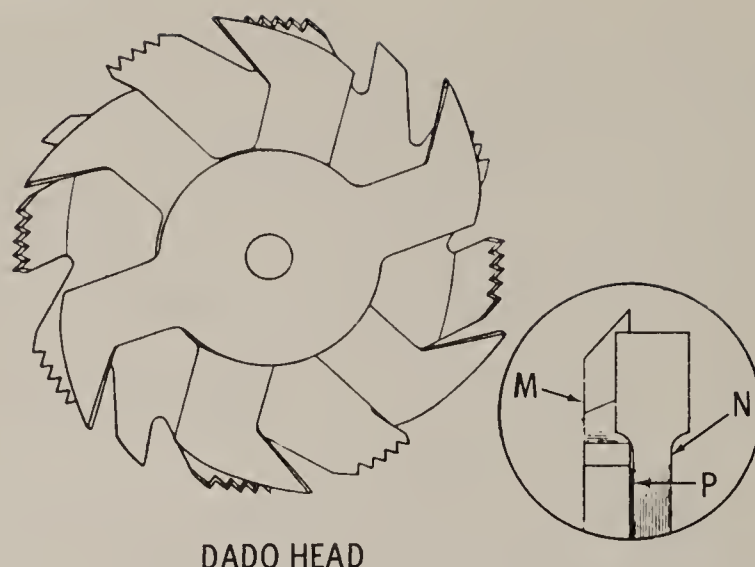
Method of cutter assembly for typical dado head, with one of the outside cutters removed for the sake of clarity. In the assembly, paper washers may be added between cutters for fractional expansion as shown at P, with M and N being outside and inside cutters, respectively.
